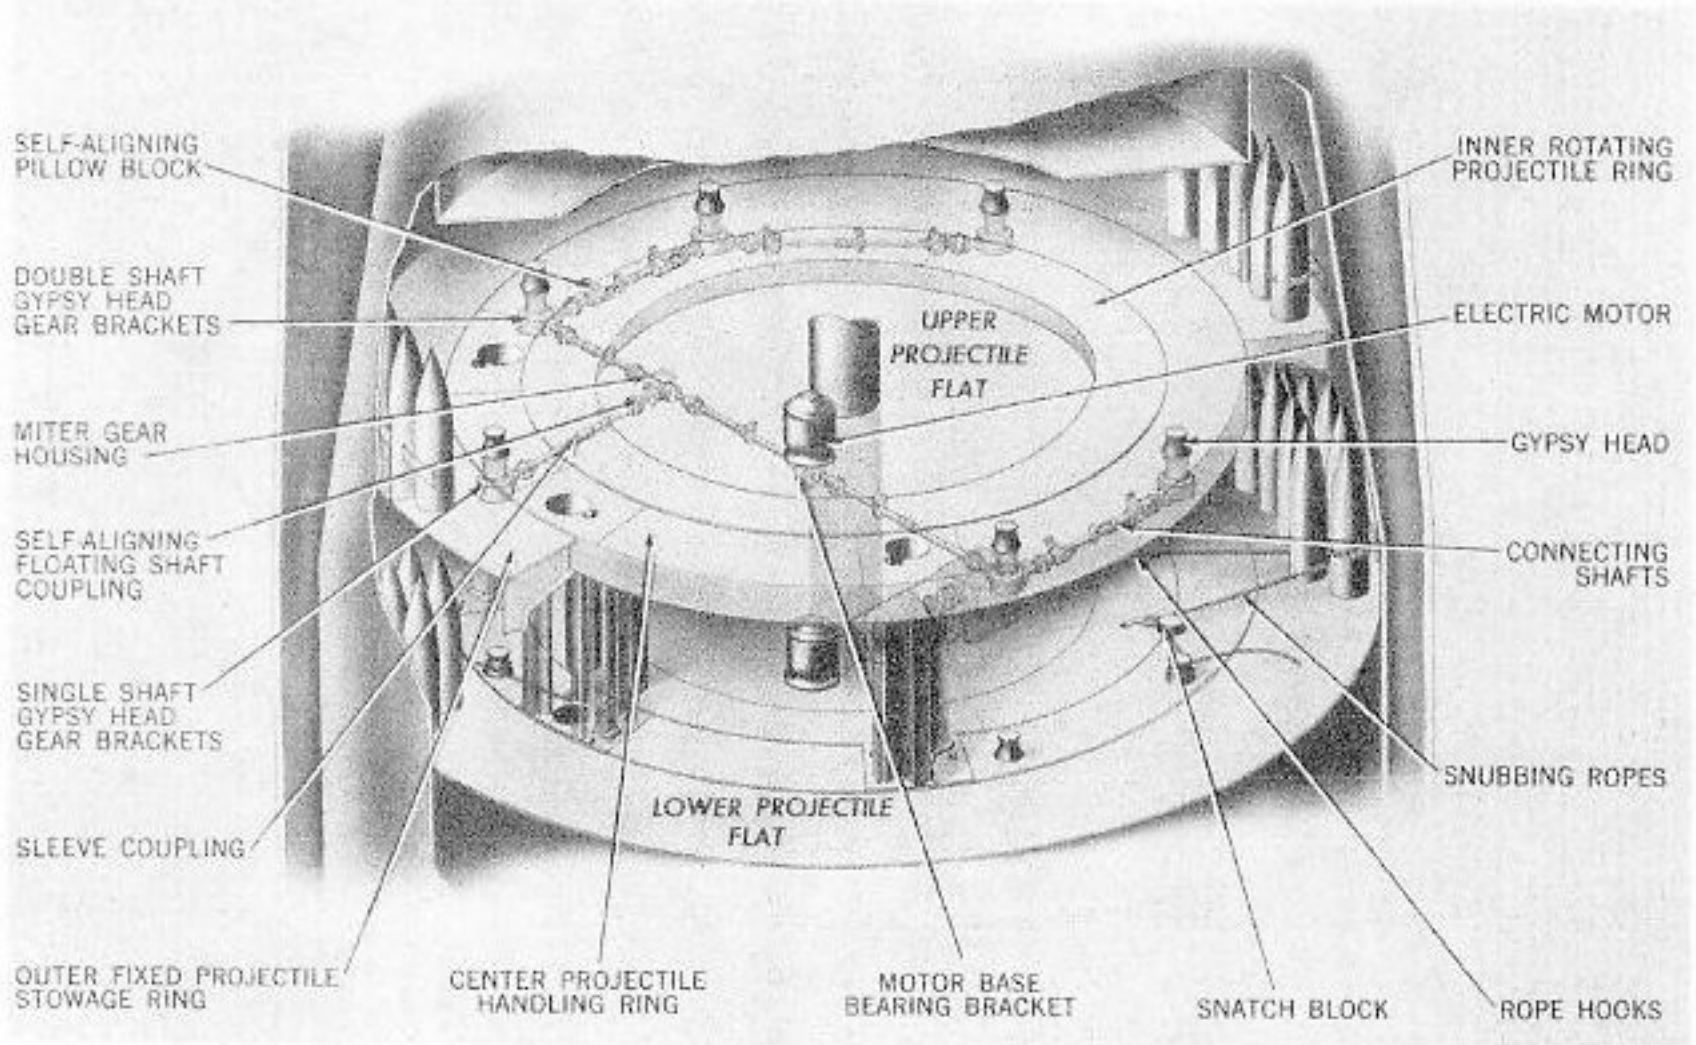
16-inch Parbuckling Gear Mk 1 Mod 0. Upper and Lower Projectile Flats, General Arrangement
